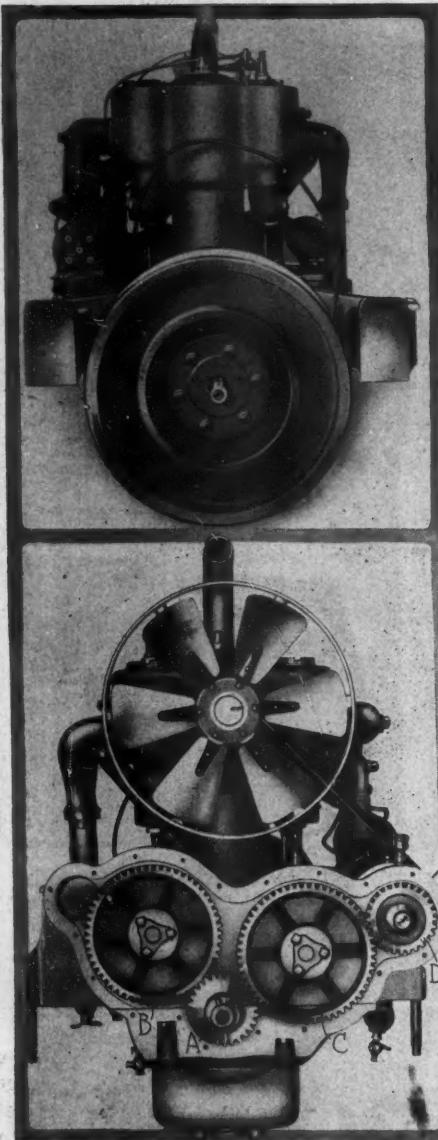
TWO END VIEWS OF HAYNES MOTOR FOR 1911. UPPER VIEW IS FROM THE REAR. LOWER VIEW IS FROM THE FRONT WITH TIMING GEAR HOUSING REMOVED TO SHOW ARRANGEMENT
